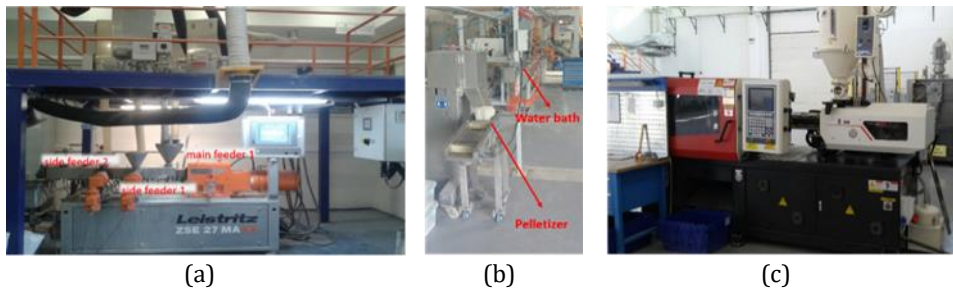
a) twin screw extruder and b) water bath and pelletizer c) Injection molding
